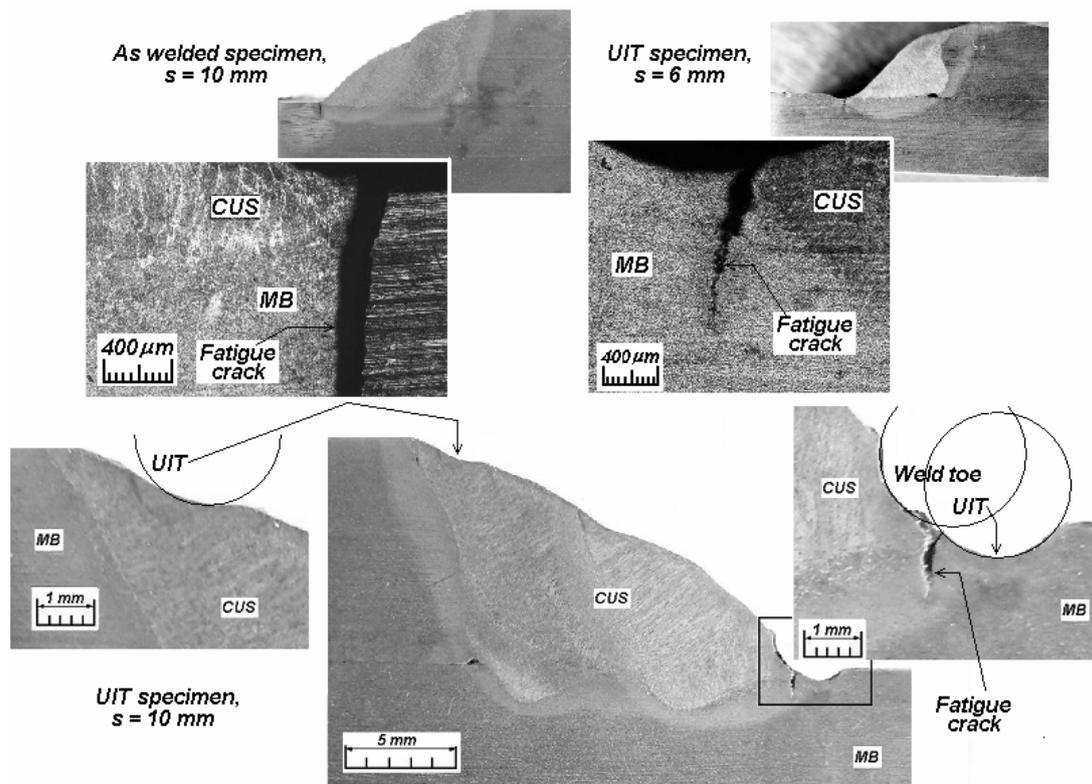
Fatigue failure initiation areas on the fillet welded lap joints between steel plates
